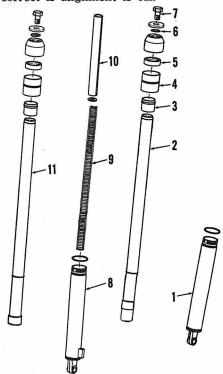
Exploded view of front suspension units used on the JT-1.
